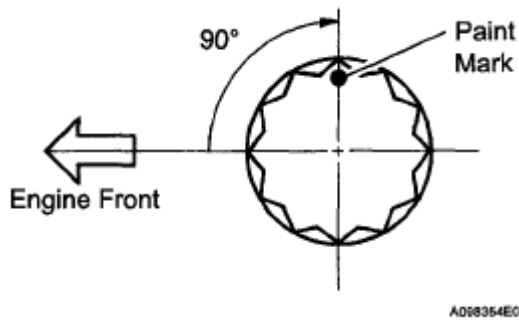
Retightening Bearing Cap Bolts An Additional 90°
